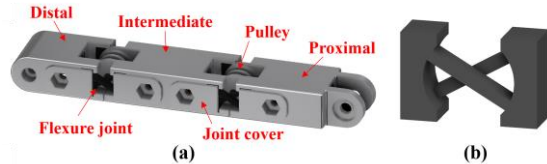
Design of the finger. (a) Assembled finger. (b) Flexure joint.
